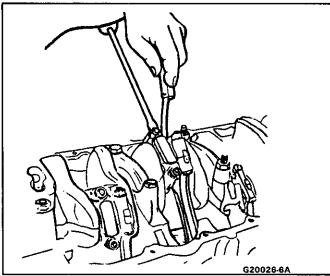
Measuring Connecting Rod Side Clearance (Double Rod Journal)
